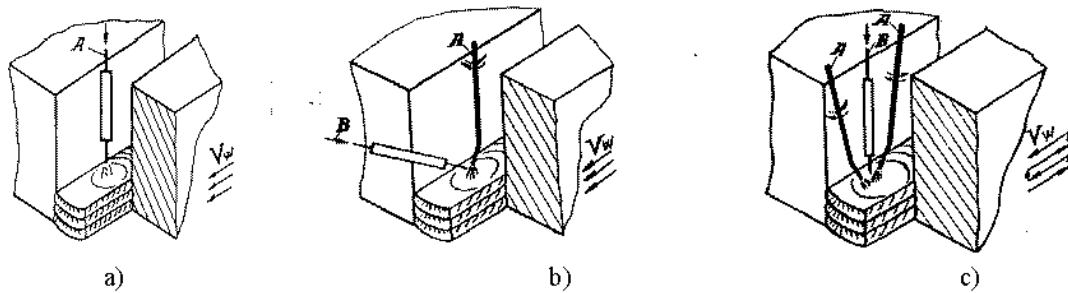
Process diagram of the narrow gap welding with consumable electrode (a) and one (b) or two (c) scanning nonconsumable electrodes. A - electrode, B - filling wire, V_w - welding direction
